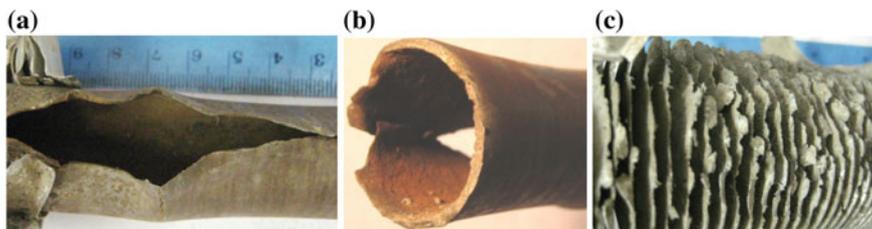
a, b Ruptured carbon steel tube in the air cooler at the overhead of aromatic tower. c Corroded aluminum fins
